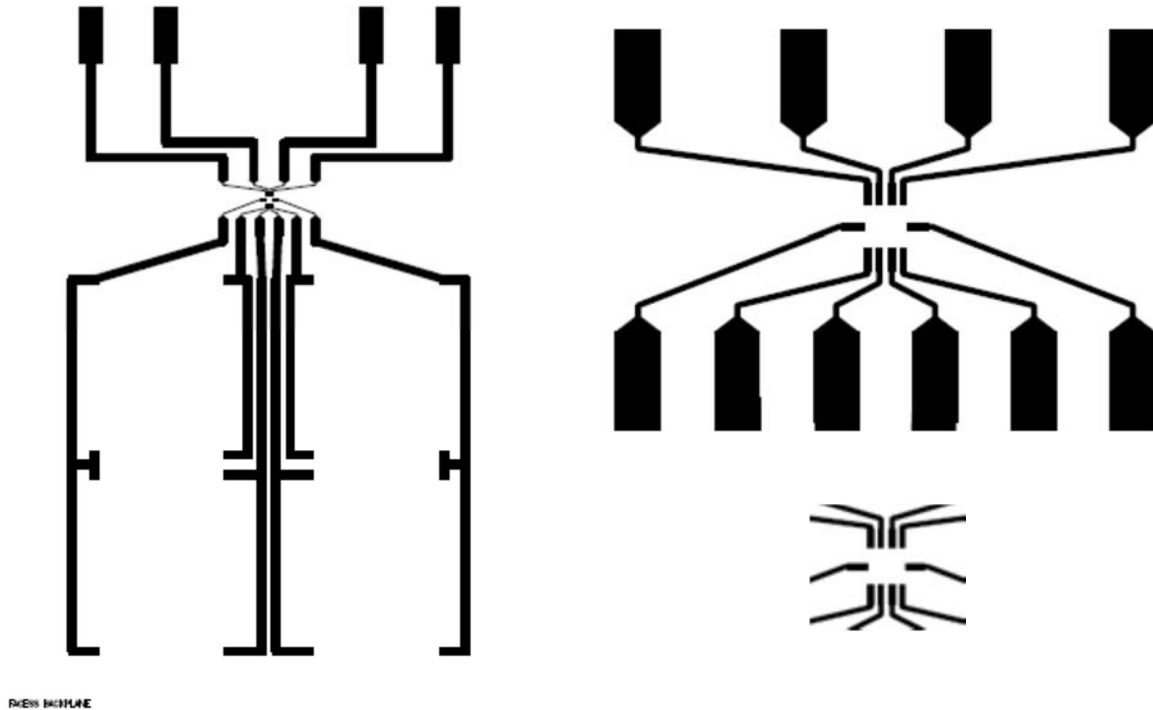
System backplane layout (left) and details of the pads for chip interconnection (right). The small strap structure shown in bottom right figure had to be used for assembly of controller electronics which was unintentionally assembled in a wrong orientation onto the backplane substrate.
